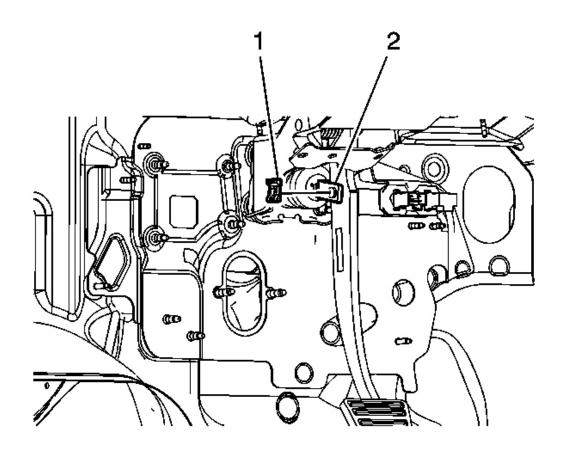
View Of Retainer & Clevis Pin Courtesy of GENERAL MOTORS CORP.
